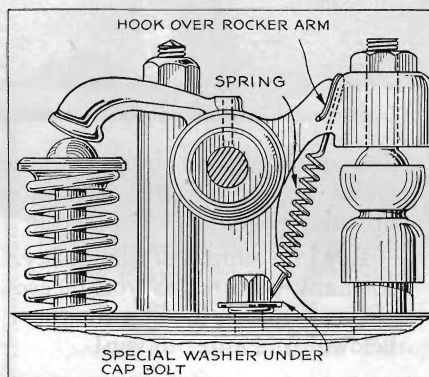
An auxiliary spring fastened to each rocker arm on overhead valves will stop rattle.
